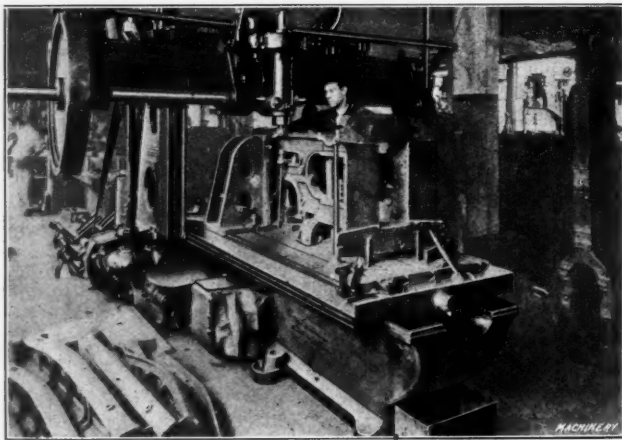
Milling the Seats and Recesses on a Nailing Machine Column
